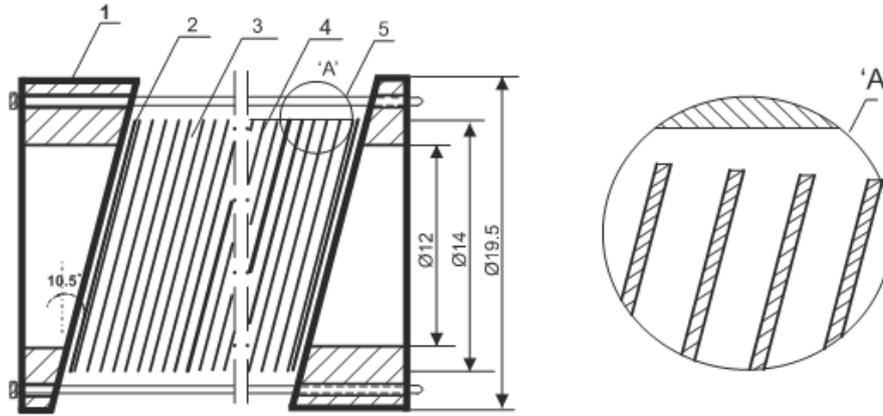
The design of ferromagnetic neutron resonator: 1 — dampers; 2 — stainless steel plates; 3 — aluminum gaskets; 4 — permalloy foils; 5 — fixing bolts.
